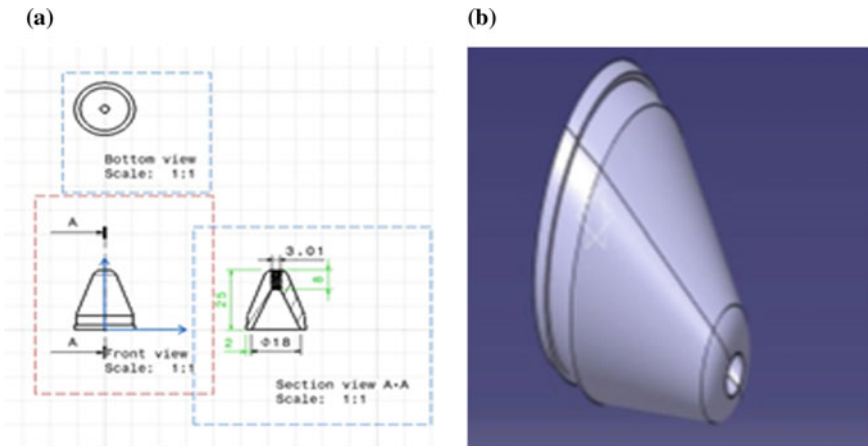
a 2D view of a conventional nozzle. b CAD model of the existing nozzle
